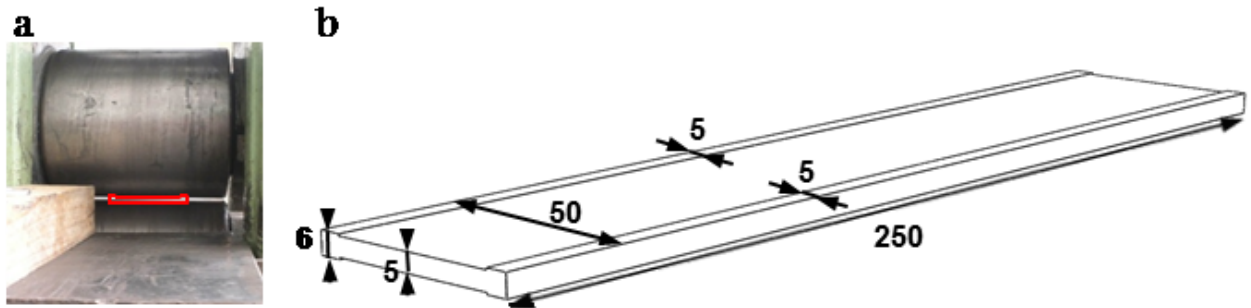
(a) rolling mill; (b) specimen geometry for fatigue crack growth experiments with residual stress zones (dimensions in mm).
